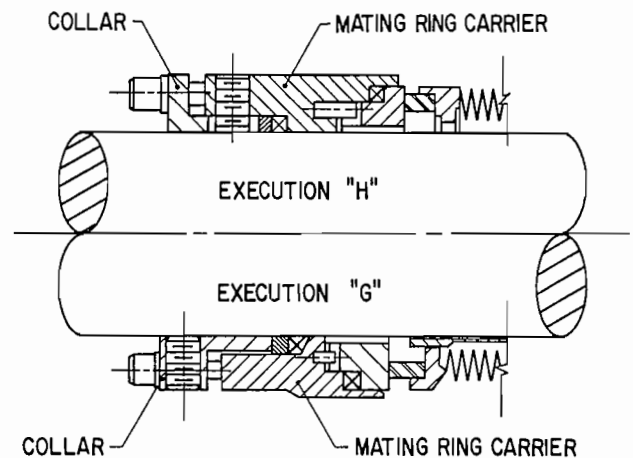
Competing Clamping Methods. Execution "G" Requires Careful Adjustment to Ensure Perpendicularity Unless Collar and Carrier Faces Are Designed to Butt-up Solidly.
